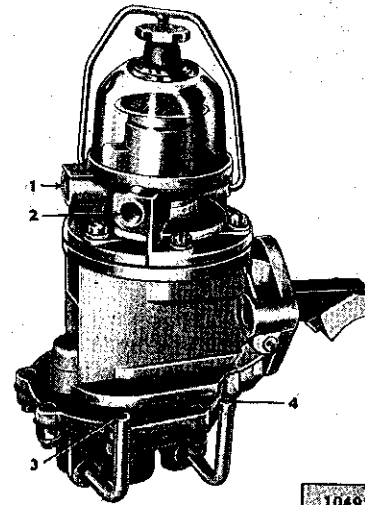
F4-134 FUEL AND VACUUM PUMP
